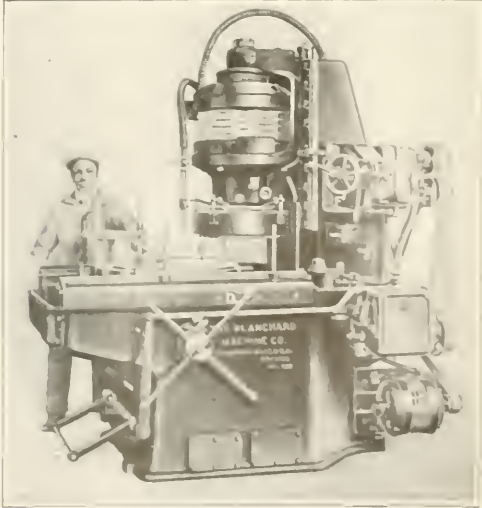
Blanchard High-power Vertical Surface Grinder—Motor-driven Type
